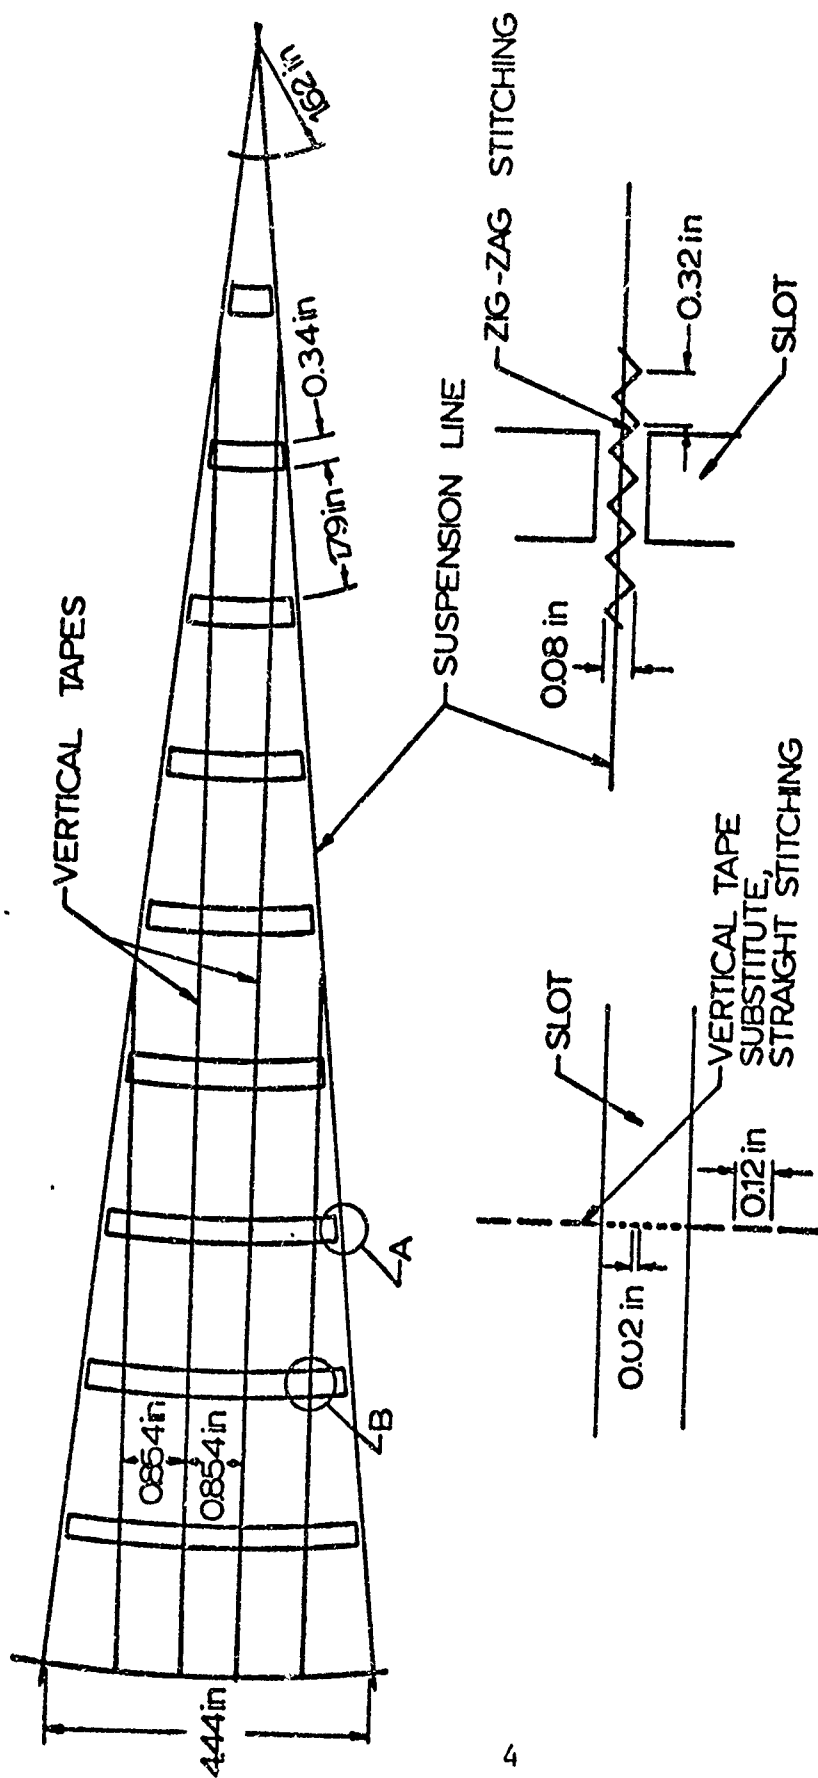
Details of a Ringslot Parachute Gore Utilizing Hot Knife Cut Fabrication Method
